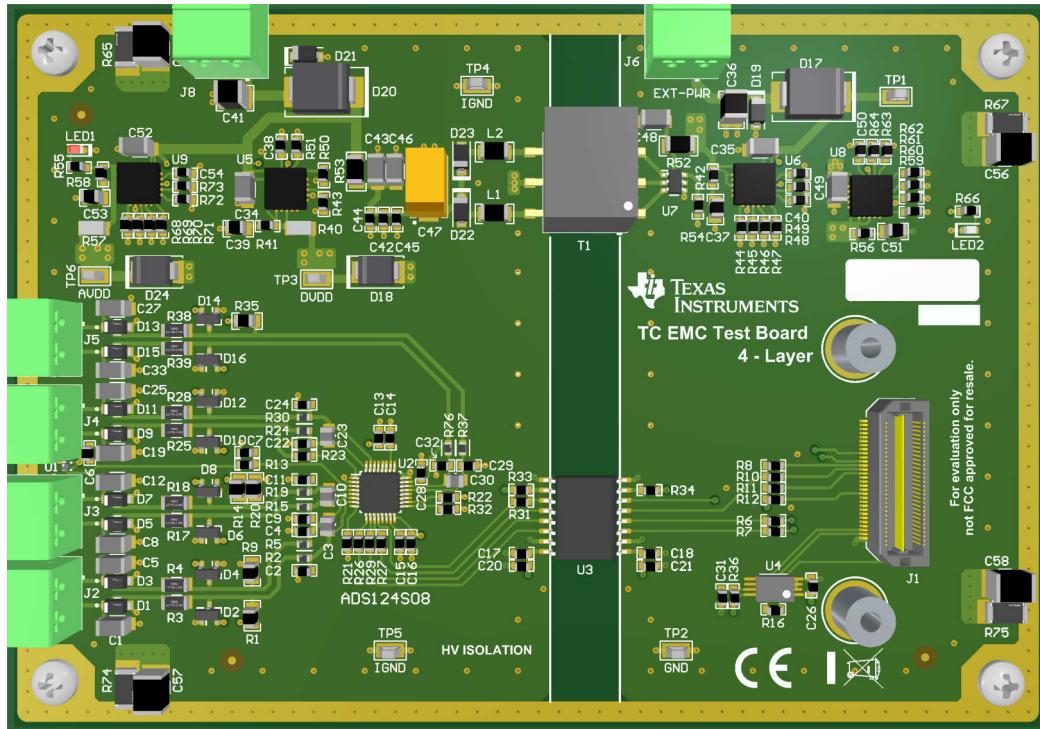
TC EMC Test Board with ADS124S08 (4-Layer)
